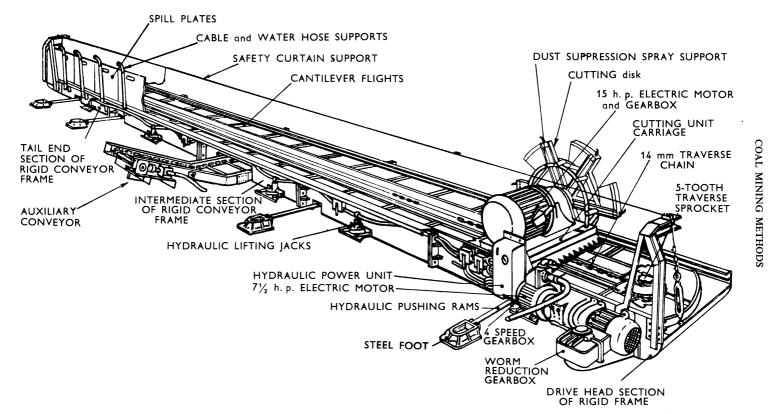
Dawson Miller stable hole machine (right-hand) (National Coal Board Central Engineering Establishment.)
